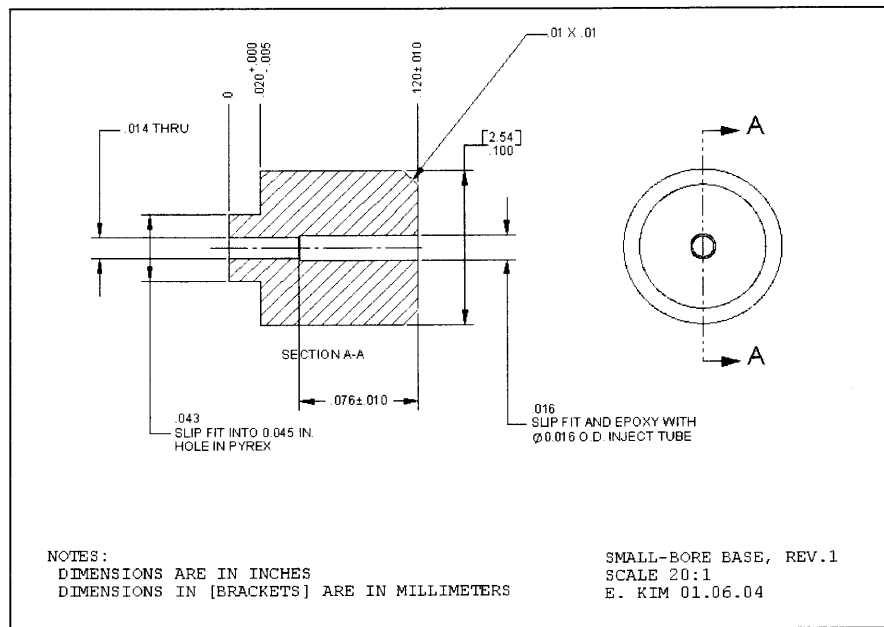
Machine drawing for small-bore fluidic fitting, base
